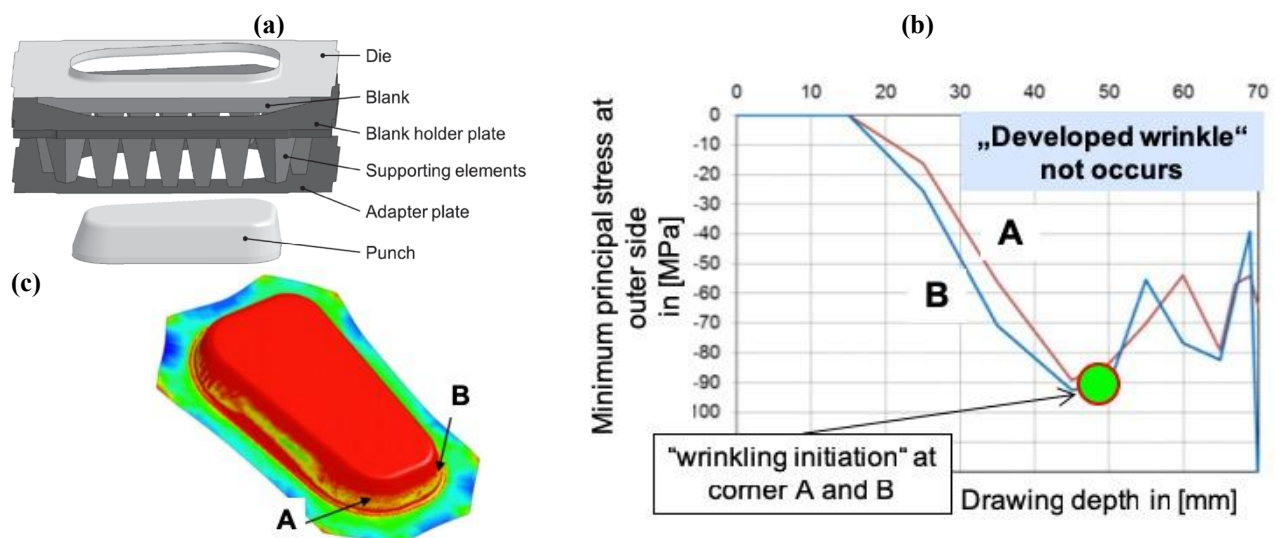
FE model for deep drawing process using elastic blank holder design [Ran15a]
